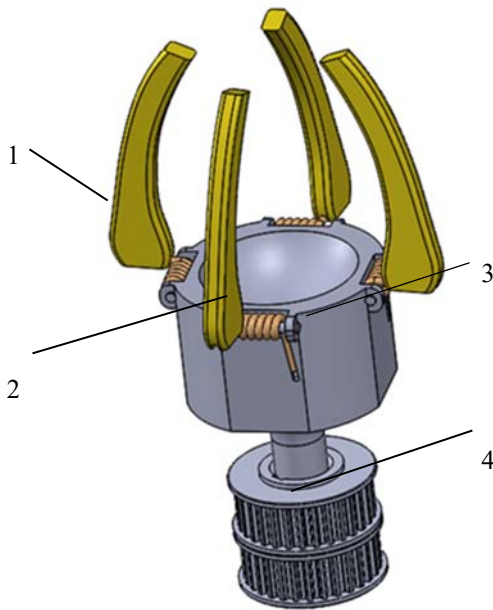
EGG SHAKER WHERE 1 - FIXED CLAW ; 2- TORSION SPRING ; 3 - SUPPORTING BASE ; 4-SYNCHRONOUS WHEEL
